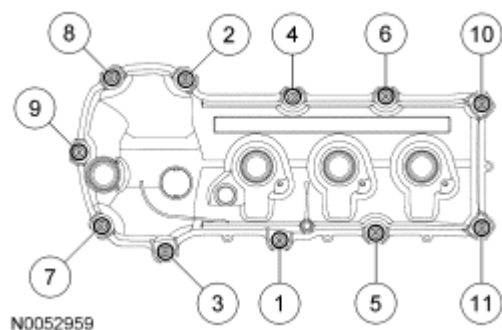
Installing LH Valve Cover Stud Bolts In Sequence
